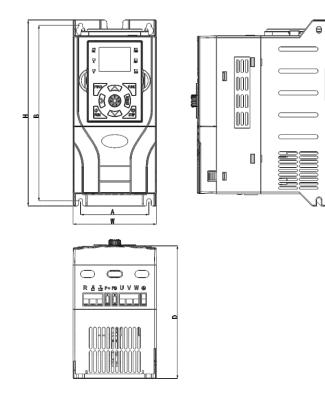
Dimensions of Inverter 0.75KW~30KW
